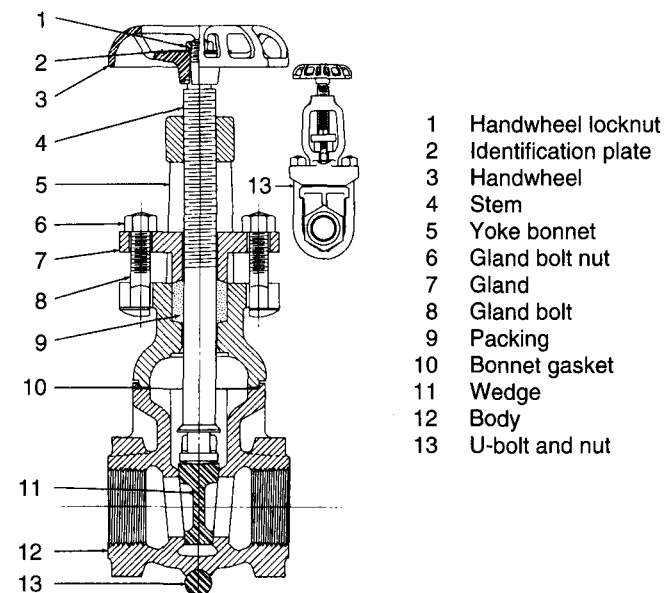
Rising-stem, U-bolt bonnet, one-piece (solid) wedge disk, outside screw and yoke (O.S.&Y.) gate valve. Courtesy Crane Company.
